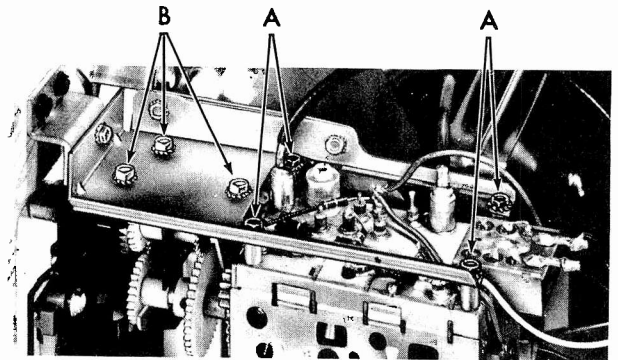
View Of VHF Tuner Shown Mounted On Chassis.
